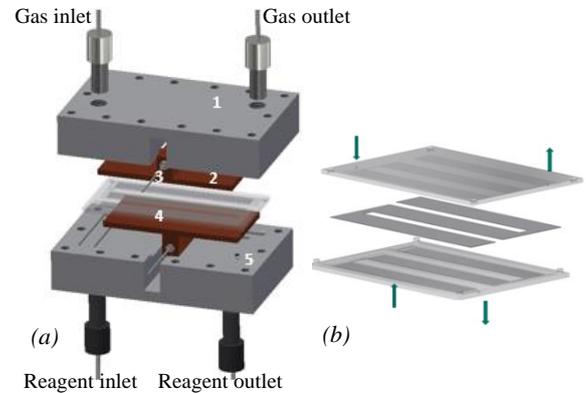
(a) (1) – Holder. (2) – Copper layer. (3) – Cartridge heater. (4) – Gas-liquid contacting chip. (5) – O-ring. (b) Gas-liquid polymer contactor: exploded view.
